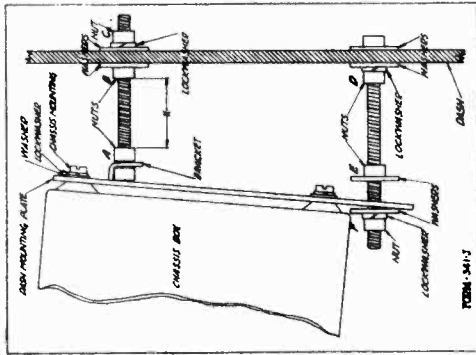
Details of Chassis Mounting on Dash after which the lockwashers and nuts are then put on.
